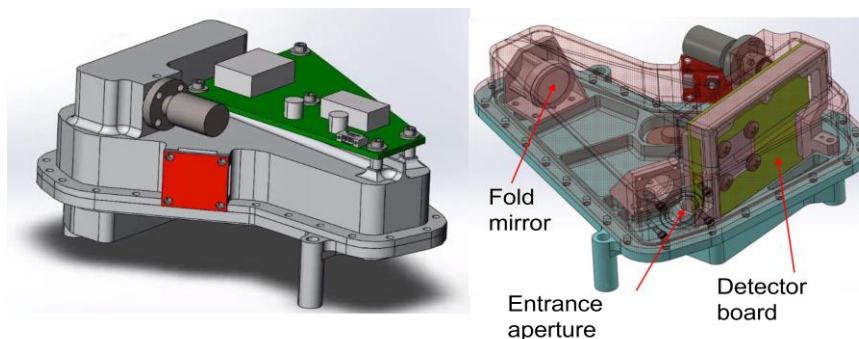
The VISORS vacuum detector chamber is the template for the detector assembly of each CMO EUV Telescope. The longest dimension of the chamber is about 15 cm.
